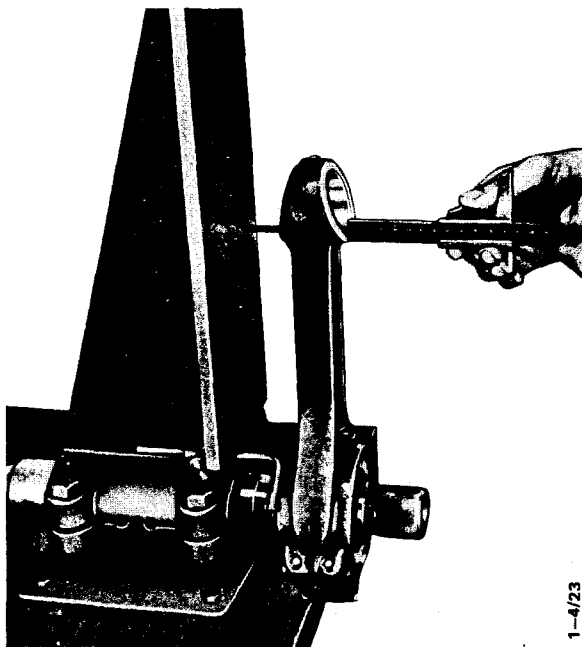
Check whether the connecting rod is bent into the shape of an S
